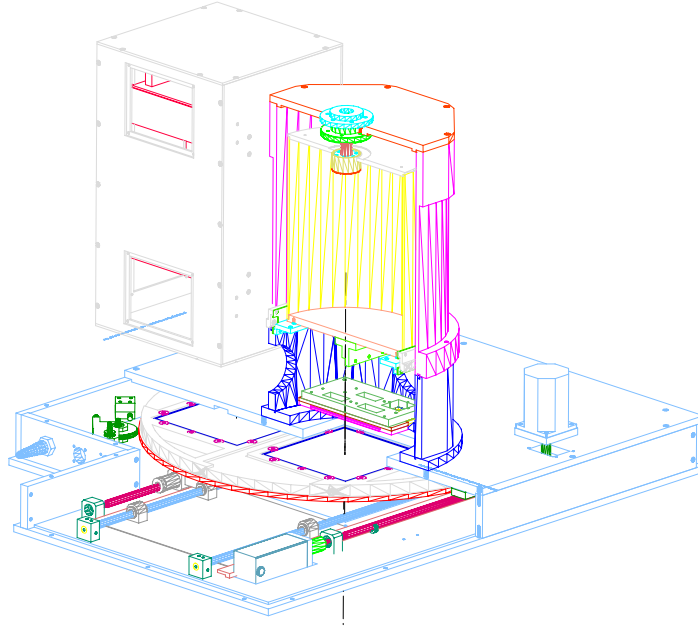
Cutaway of the total LFC mechanical assembly. Shown are the shutter (partly visible at bottom), and filter wheel (gray disk partly visible at the top of the cutaway structure), and a cross section of the dewar with focal plane (shown in green) and the LN2 can (in yellow). The electronics enclosure is also shown mounted on the side of the dewar.
